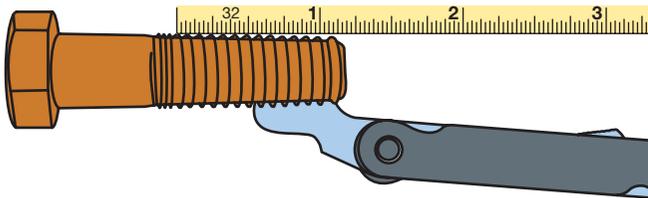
Thread pitch gauge used to measure the pitch of the thread. This bolt has 13 threads to the inch.
